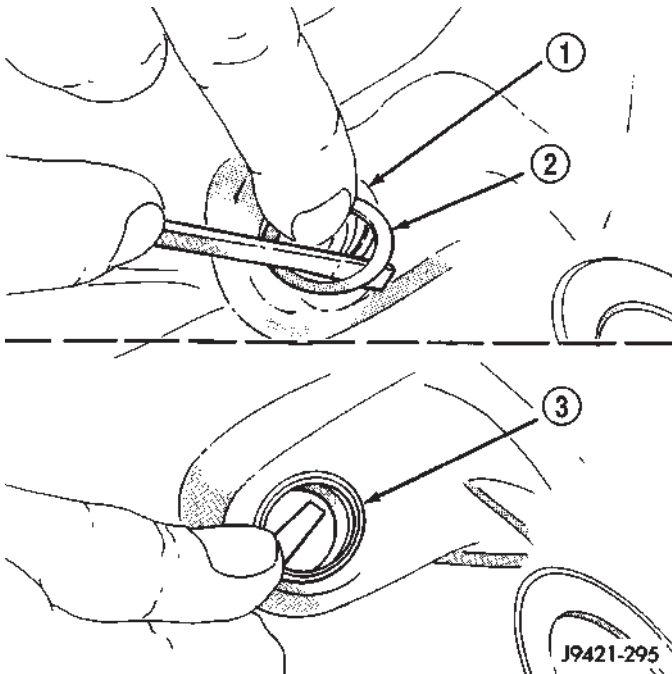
Removing Sector Shaft O-Ring And Retainer
